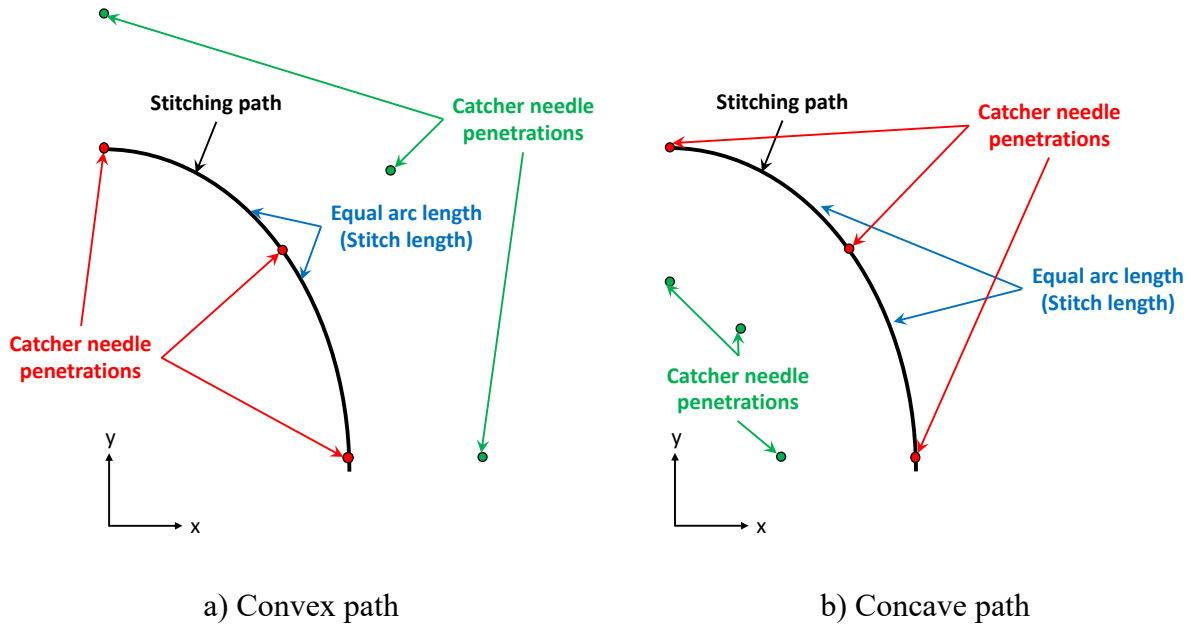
Definition of convex and concave stitching paths for RS535 stitching head with head rotation about tool point coordinate system z-axis.
